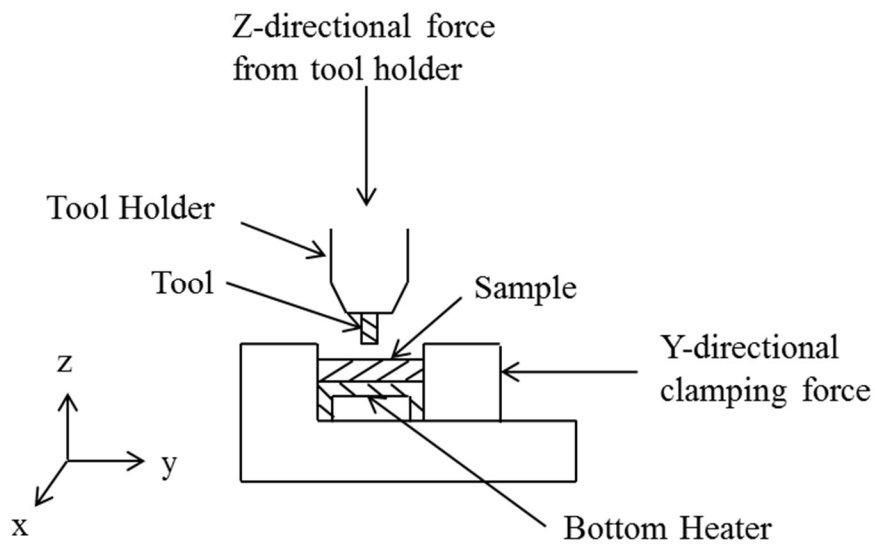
Clamping mechanism to hold the sample with a bottom heater
